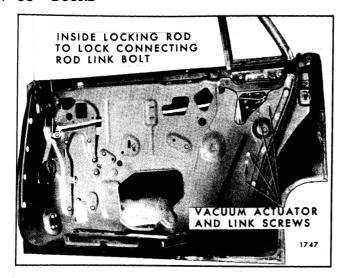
Vacuum Lock Actuator Removal - 68069-68169 Styles
